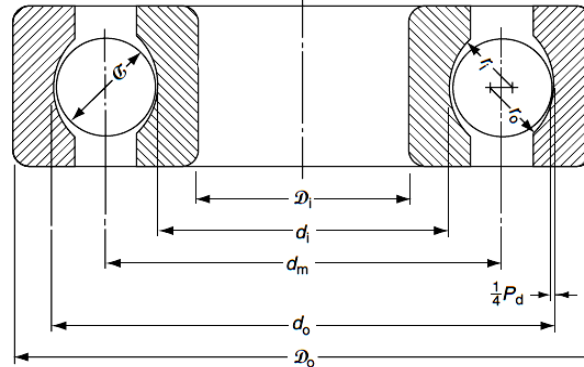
Geometry of deep groove ball bearing Nr. 6004, [27].
